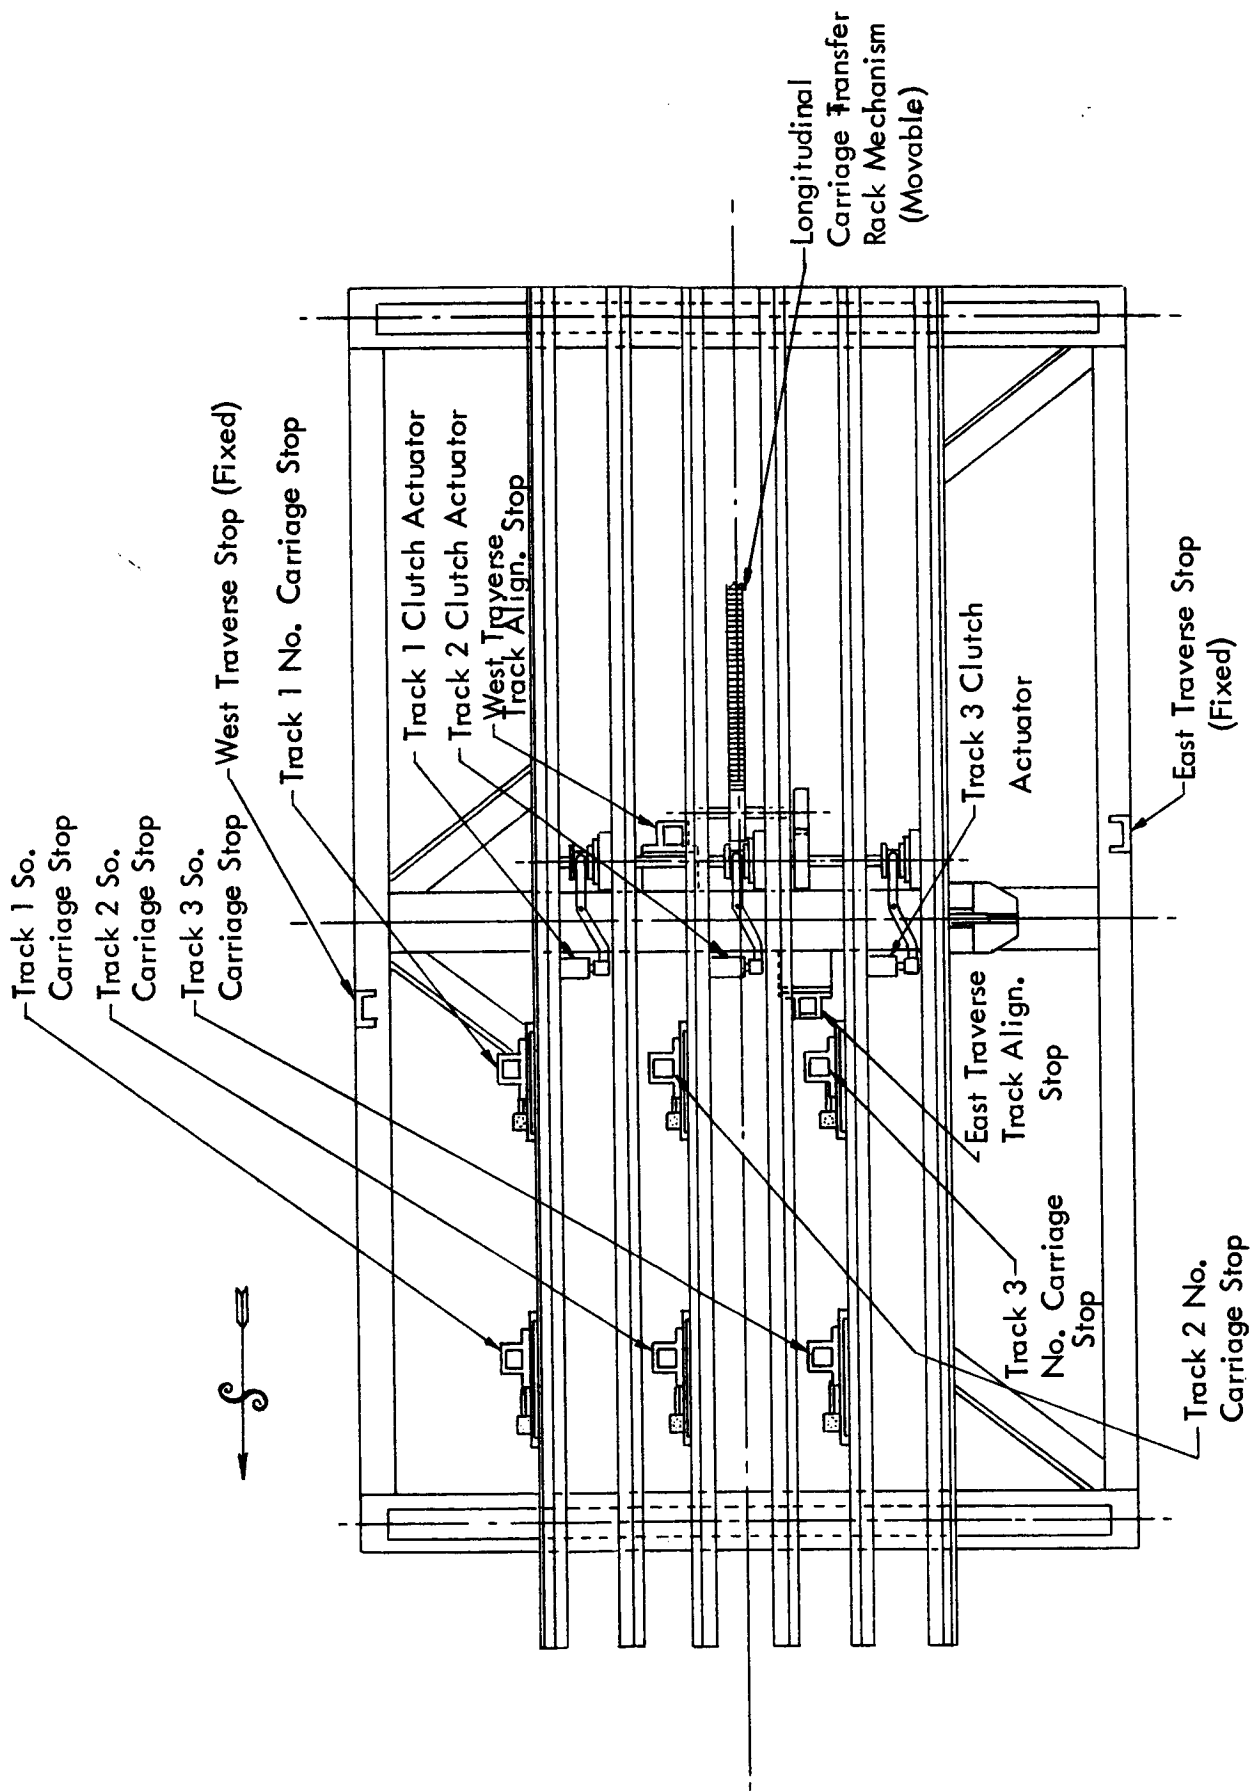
TRANSFER SYSTEM SOUTH TABLE - PLAN VIEW
